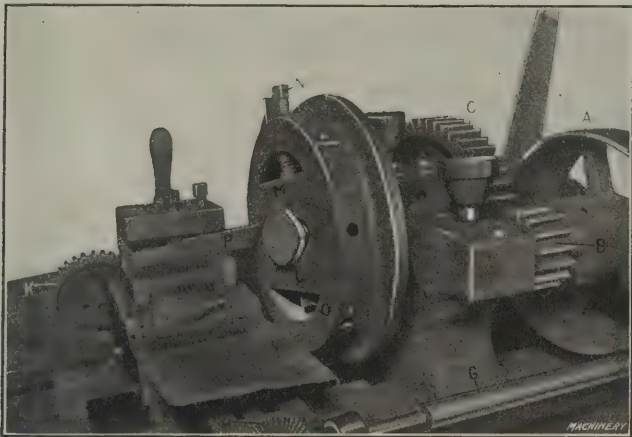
View showing Construction of Old Chuck and Tool-slide
